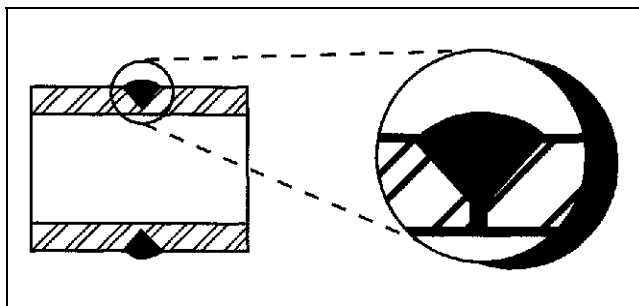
Incomplete fusion in pipe root pass weld
